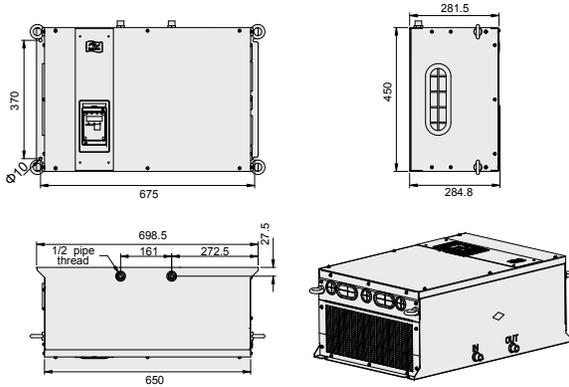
Physical appearance and mounting dimensions of IS300(*)210-C-L, IS300(*)250-C-L, and IS300(*)300-C-L
